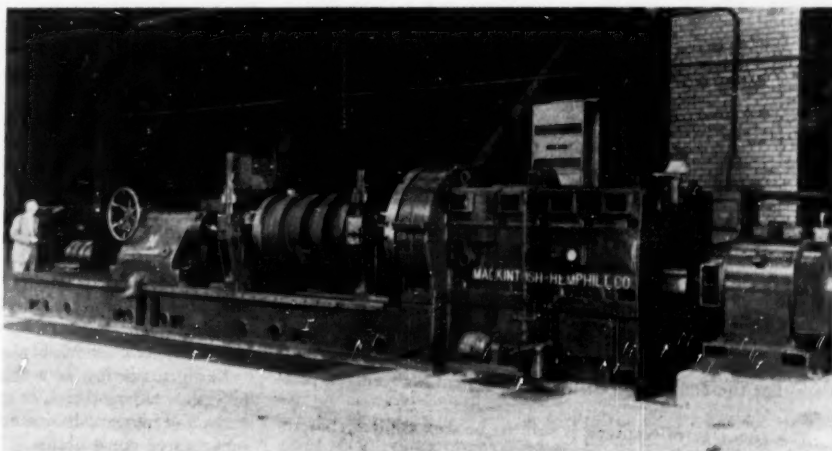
OVER-ALL VIEW OF 45-FT-LONG AUTOMATIC CONTOUR LATHE SET UP FOR TURNING A CAST-STEEL SHAPE ROLL
